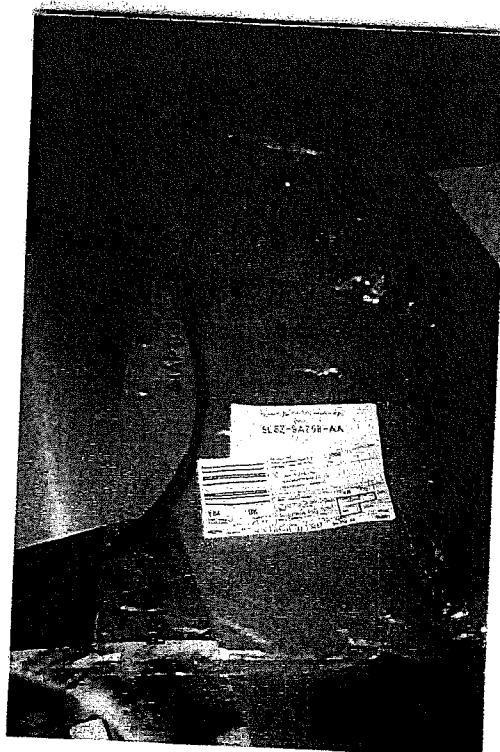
shows a view of the parts tag on the cable. This parts identification tag indicates that this is the new accelerator cable package. The old accelerator cable was placed into the package for storage purposes at the Ford dealership.
